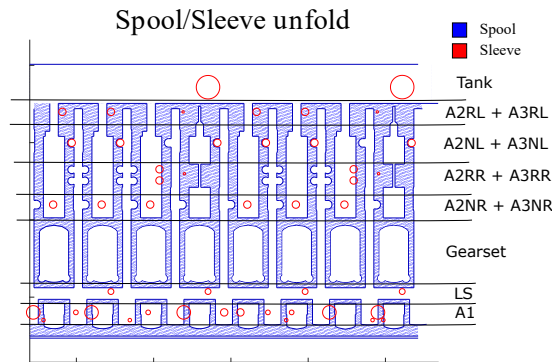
Unfolded view of spool/sleeve in neutral. Larger view in Figure A.11. [2]
